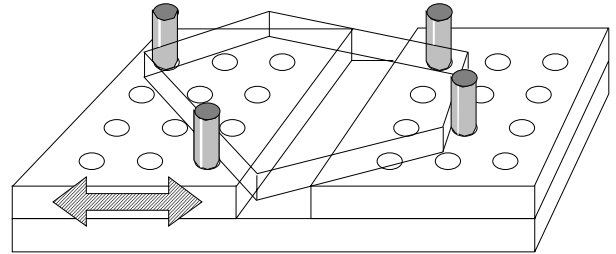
A fixture vice consists of two fixture table jaws capable of translating in  $x$ .
